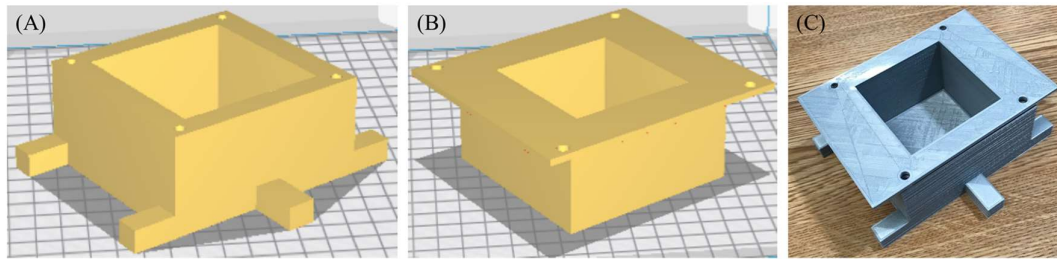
3D printed mould (A) design of the base, (B) design of the cover and (C) assemblage of the mould.
